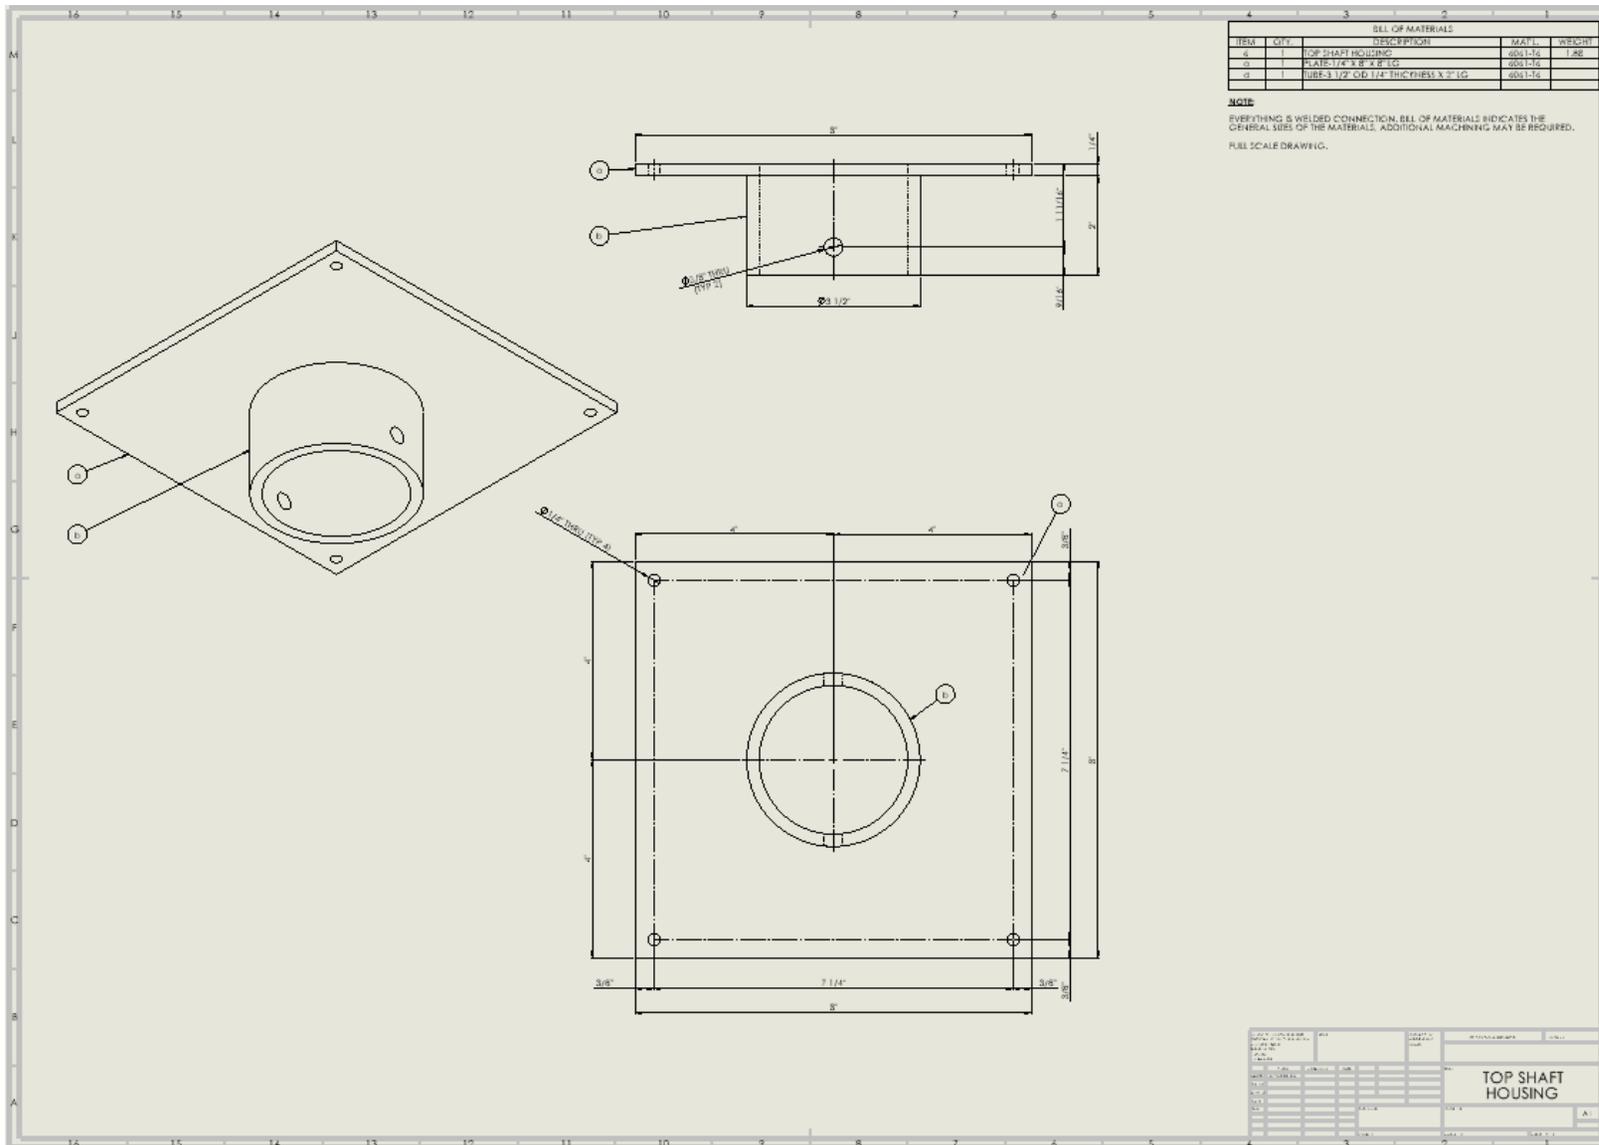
Fabrication Instruction Sheet for Top Shaft Housing
